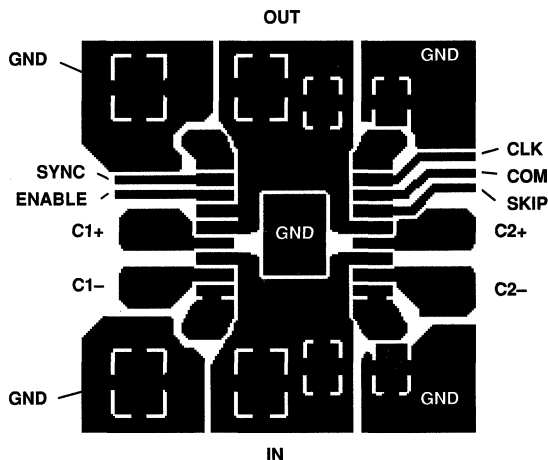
Recommended PCB Layout for TPS60110 (top view)
